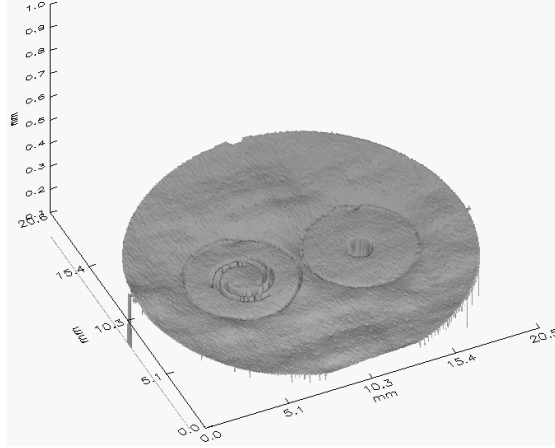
White light interferometry data showing the topology of a foil stack of passive check valves joined to a micropump base. The $50\ \mu\text{m}$ thick foils are stacked and tacked to the rigid base with several micro-spot welds. Circular welds around each valve joins the foils to the base with a hermetic seam. Heat impacts of the laser welding process cause foil warpage, which leads to non-planarity of the foil components.
